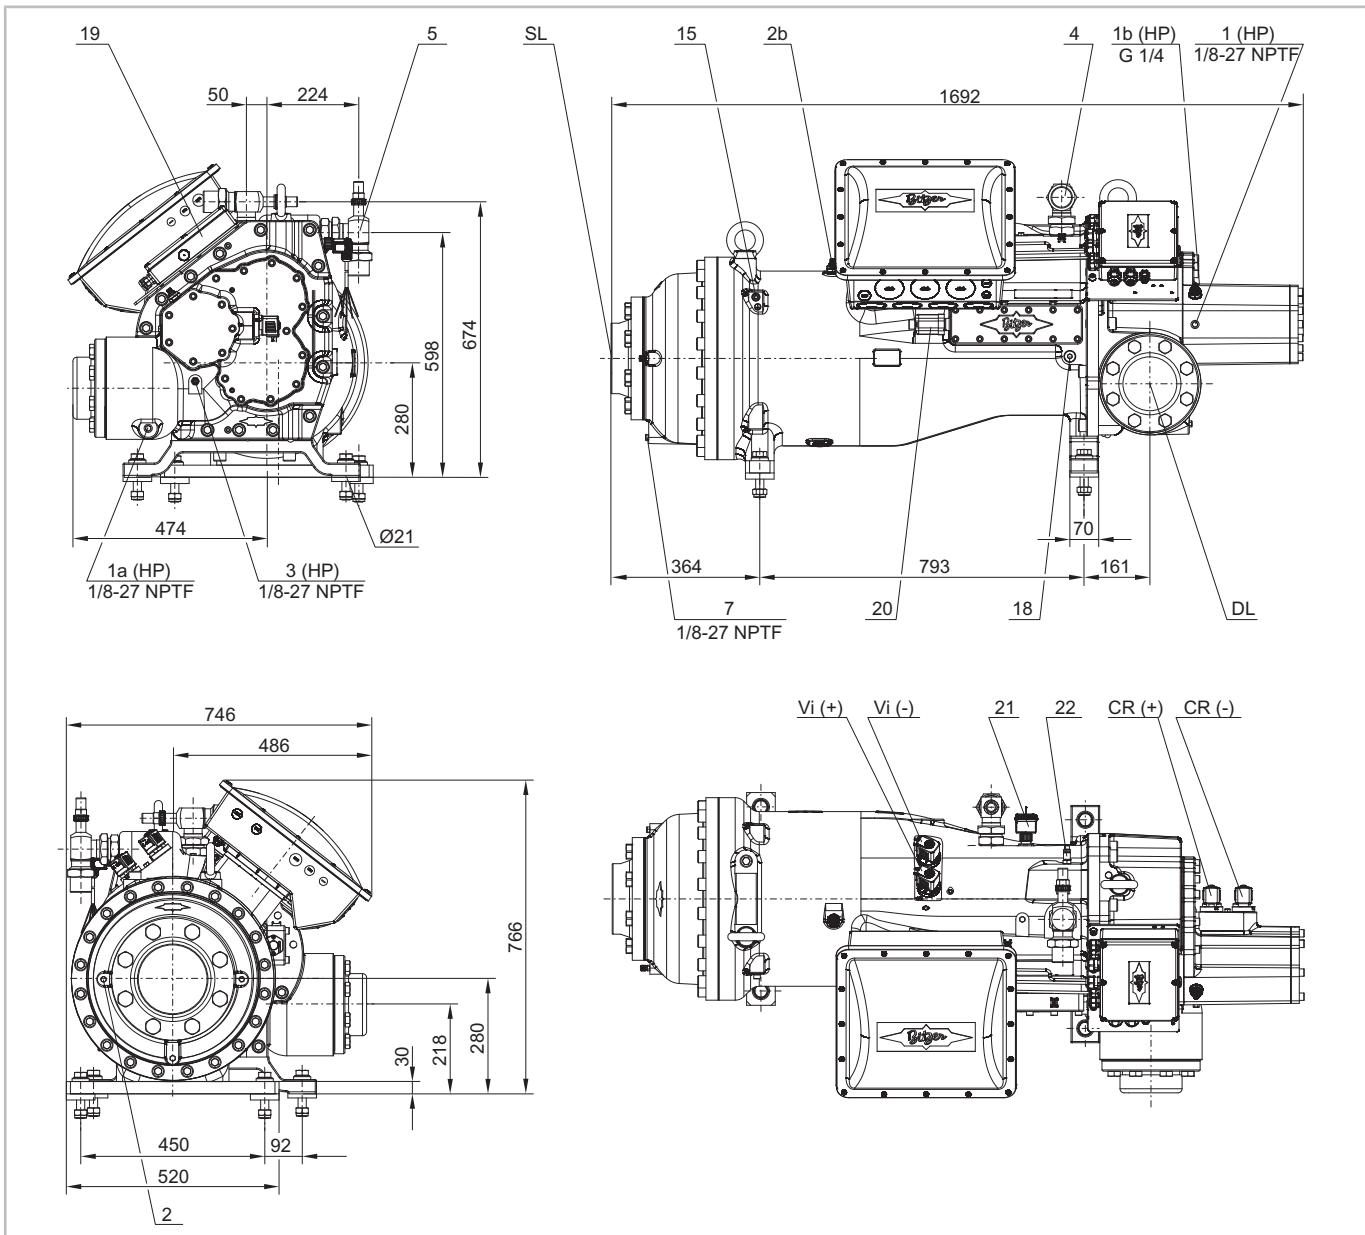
Dimensional drawing HS.9593 and HS.95103
